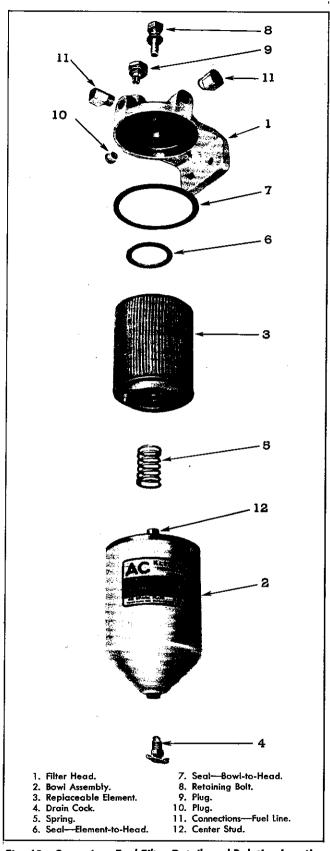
Secondary Fuel Filter Details and Relative Location of Parts.
